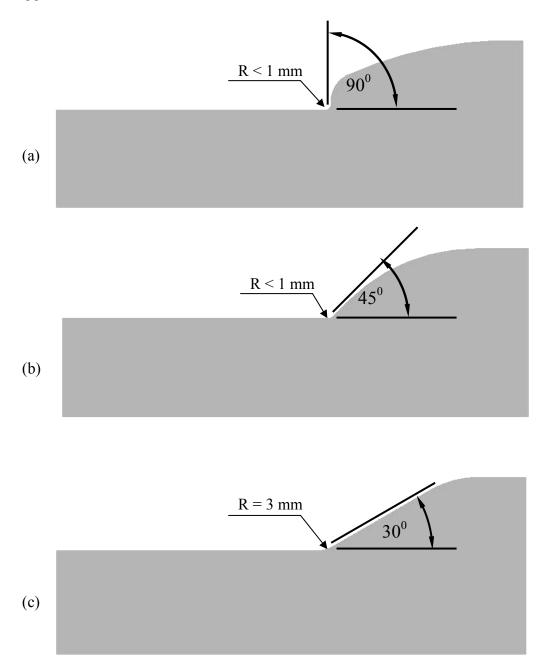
Weld geometries for (a) Series A, (b) Series B and C, and (c) Series D and E.
